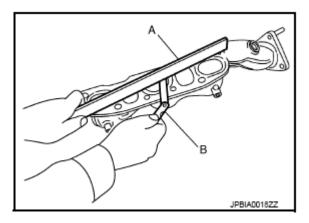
Checking Surface Distortion Of Exhaust Manifold Mating Surface Using Straightedge And Feeler Gauge
